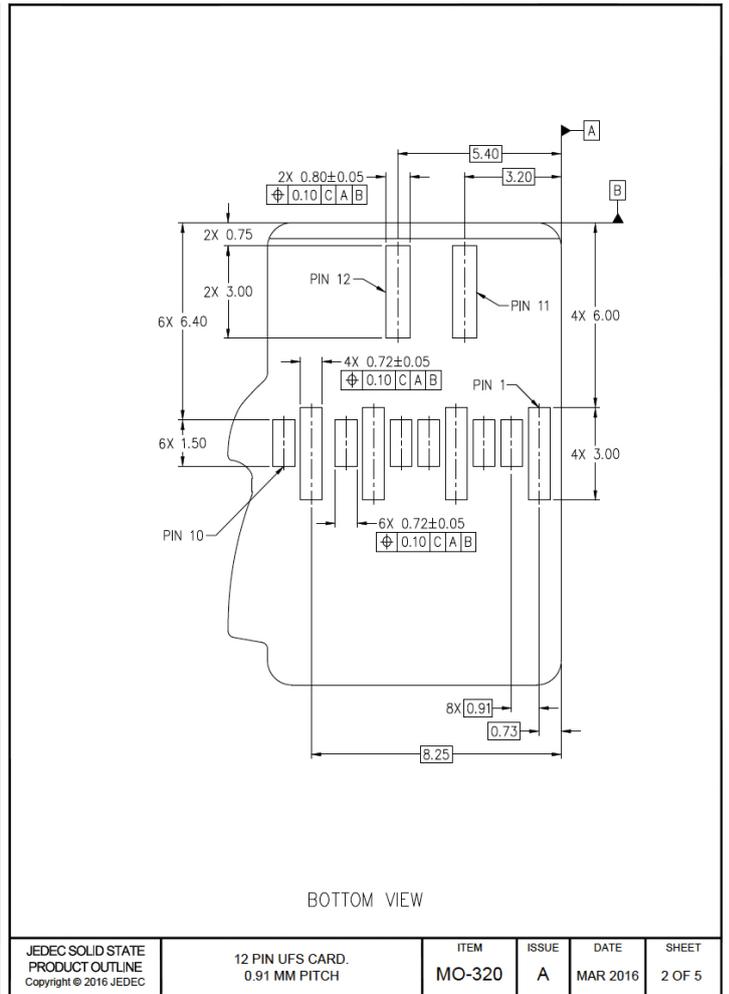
12-pin UFS Card (0.91mm pitch) Bottom View
